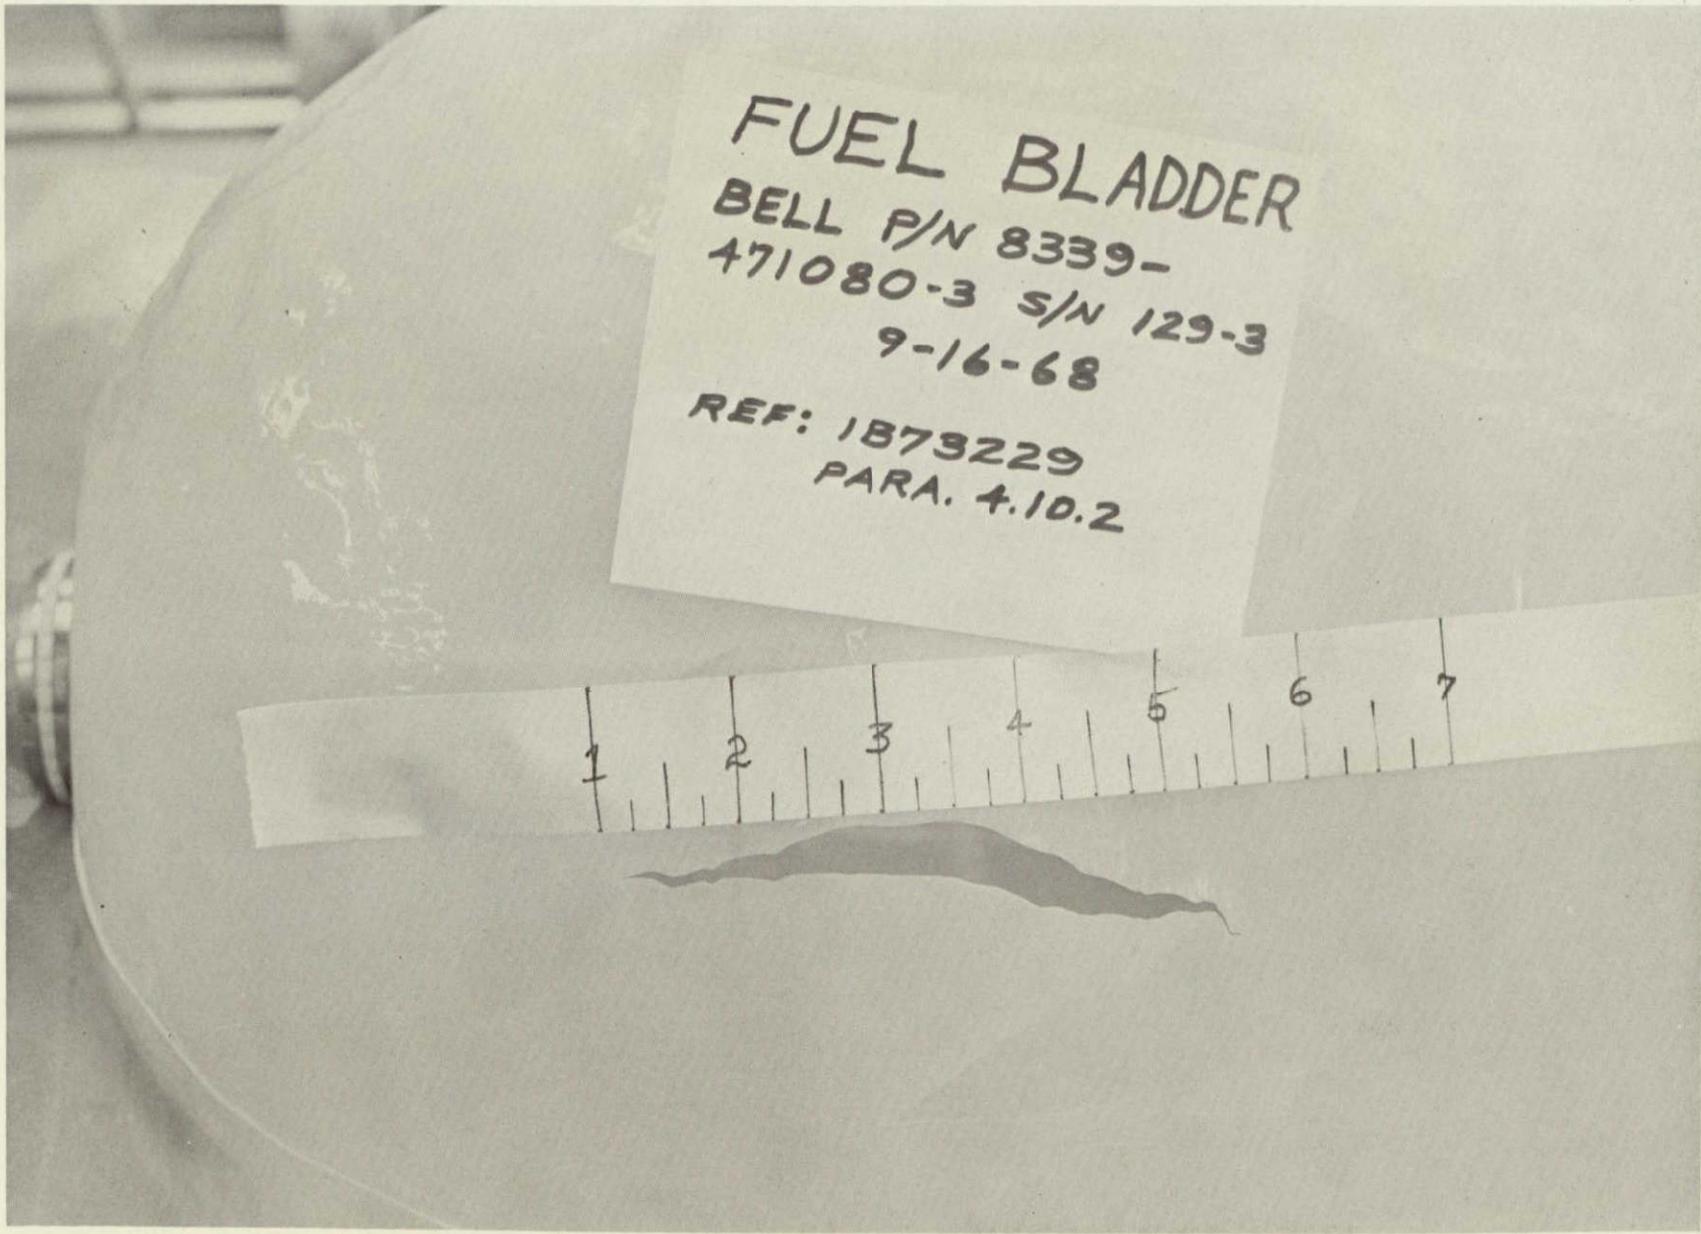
Fuel Bladder (Sheet 2 of 2)
